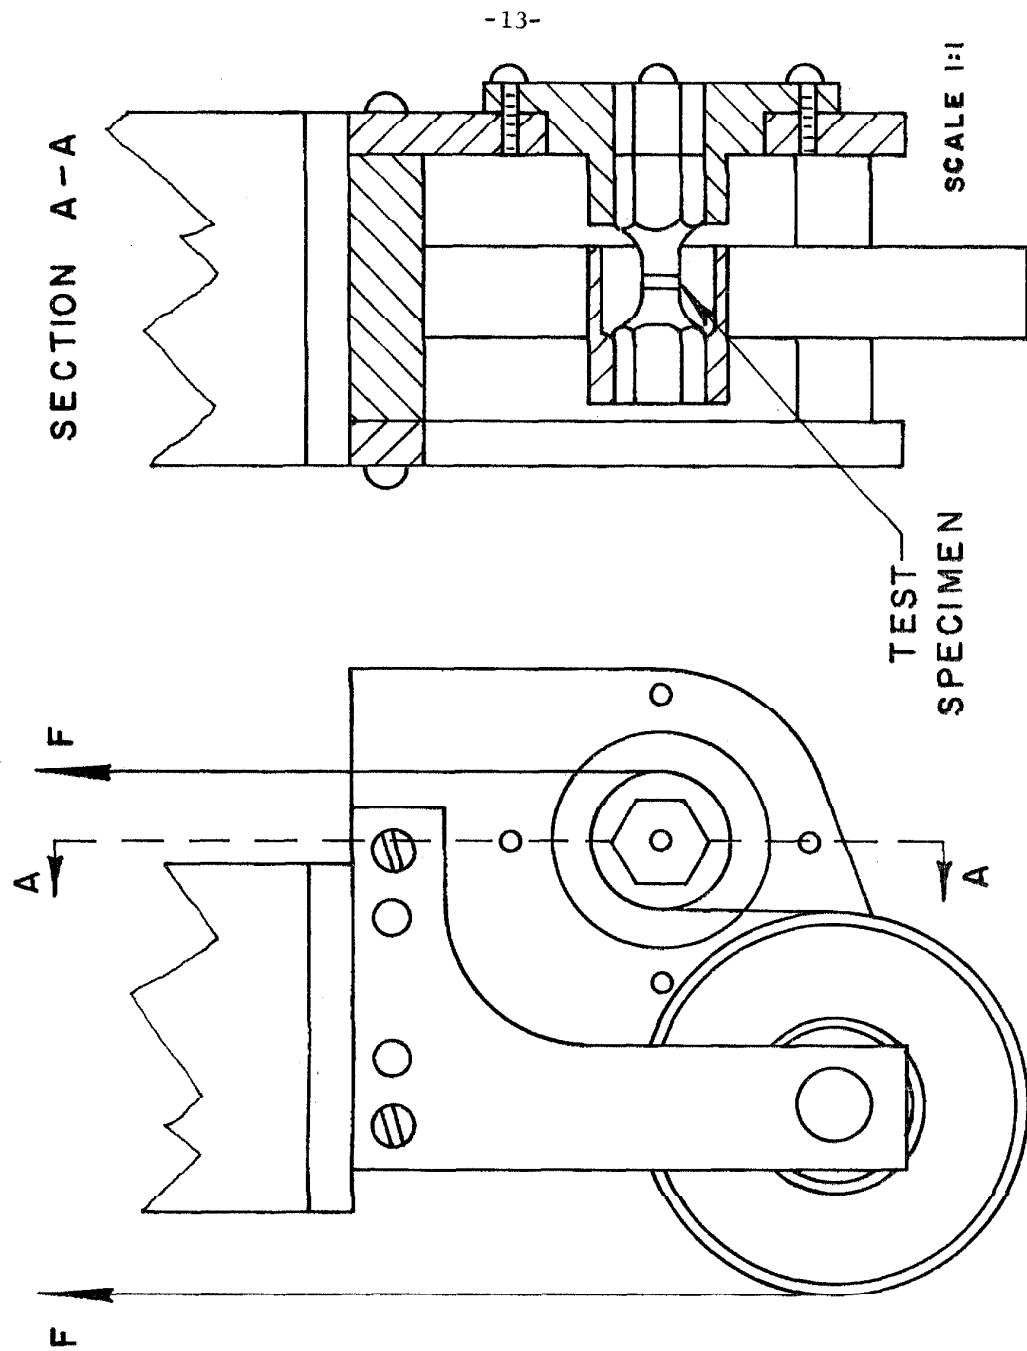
Drawing of Torsion Adapter for Rapid Load Testing Machine. Arrows Marked F Indicate Direction of Force Applied to Load Straps by Load Machine Piston.
